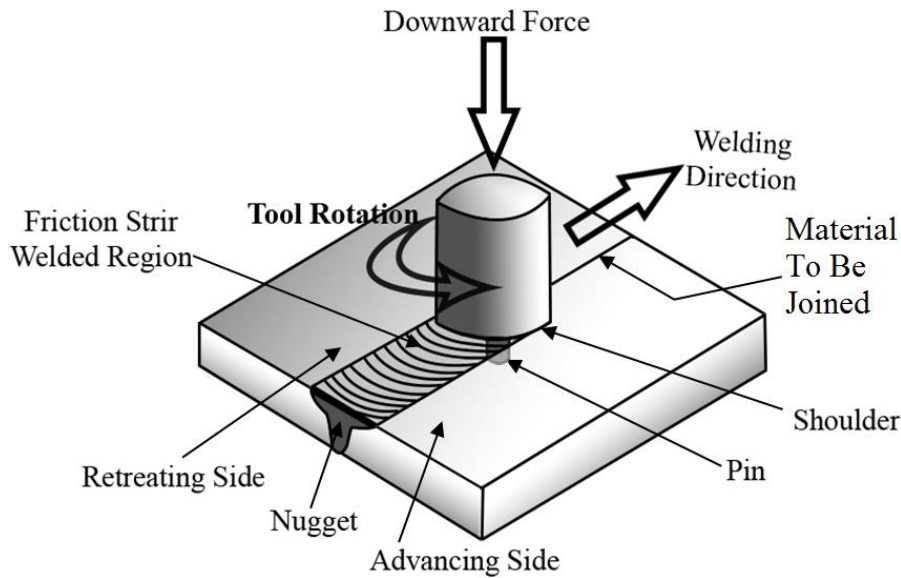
Schematic diagram of FSW, tool with featured tool pin and shoulder
